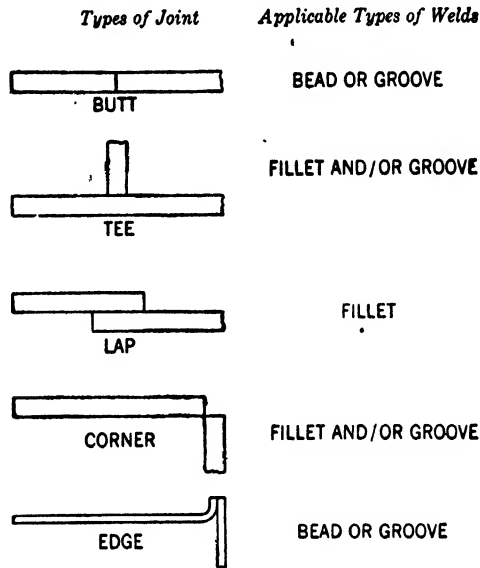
Types of joint, and the applicable types of welds.
